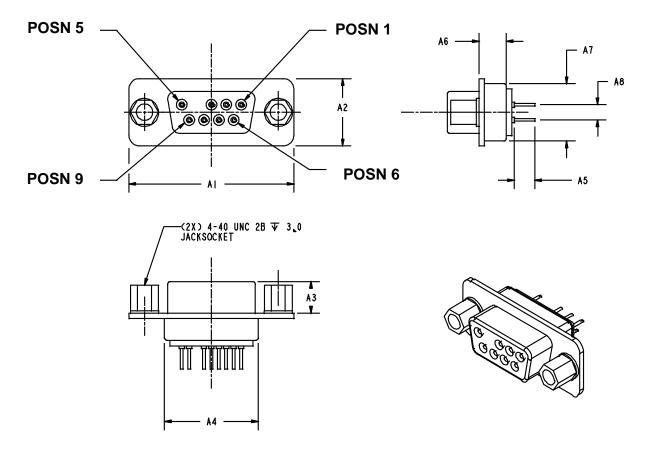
Fixed board straight through hole (version 2) overview and outline dimensions
